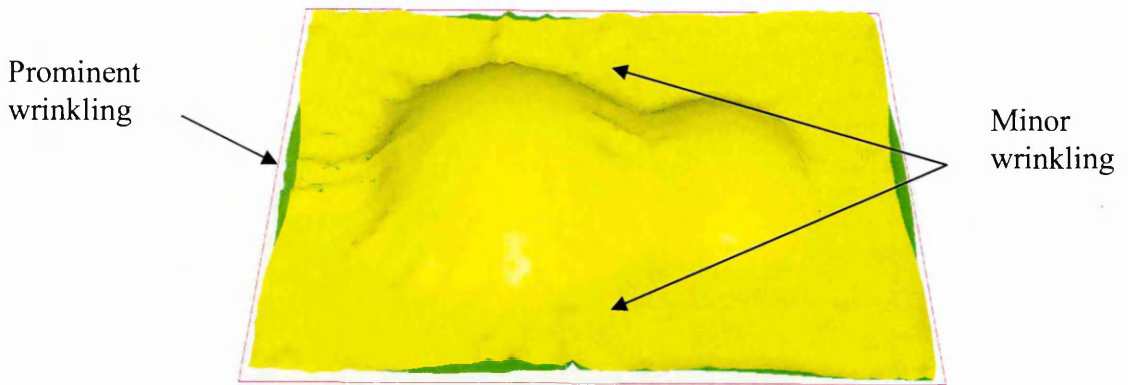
2/2 twill 0°-90° sheet on ±45° sheet
